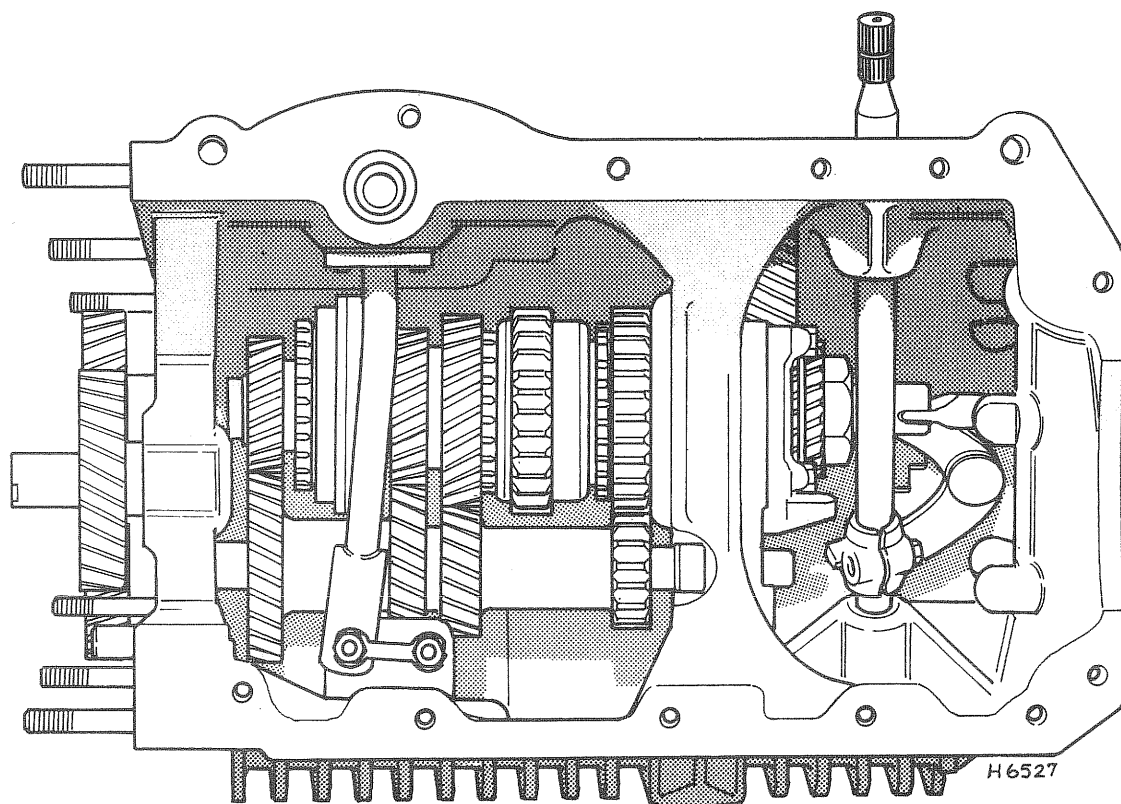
Internal view of the early type transmission assembly (Sec 1)
